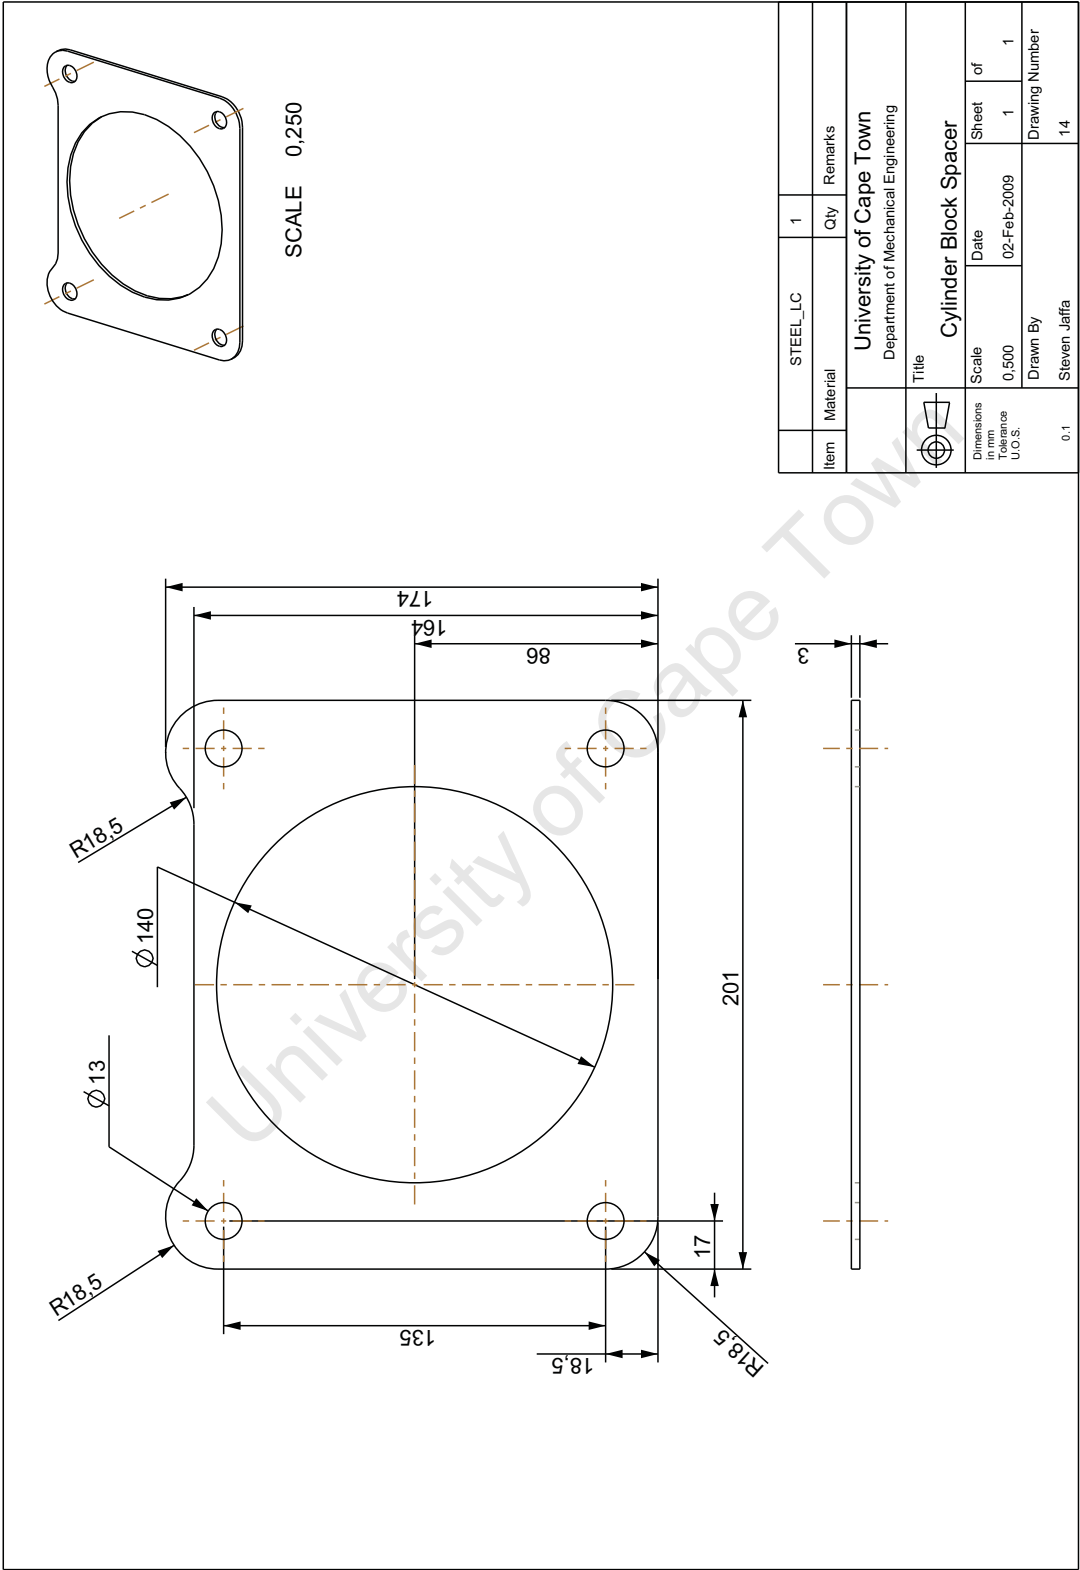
Manufacturing Drawing: Cylinder Block Spacer.
